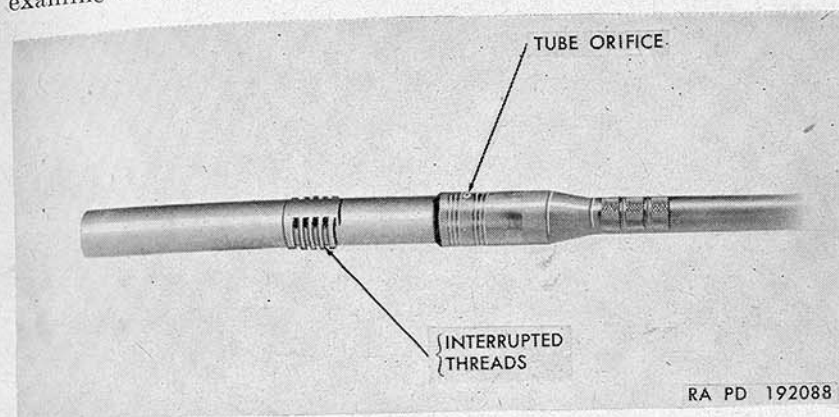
Tube orifice and interrupted threads of barrel assembly.
